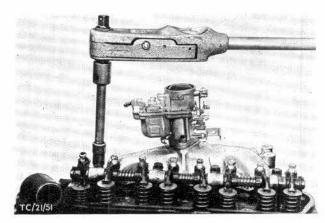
Torque rocker shaft bolts as specified. (See Technical Data).
